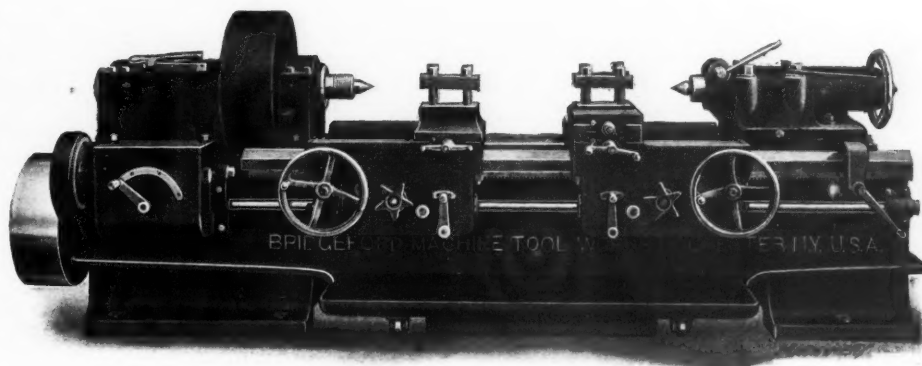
Front View of Bridgeford 27-inch Plain Turning Machine
